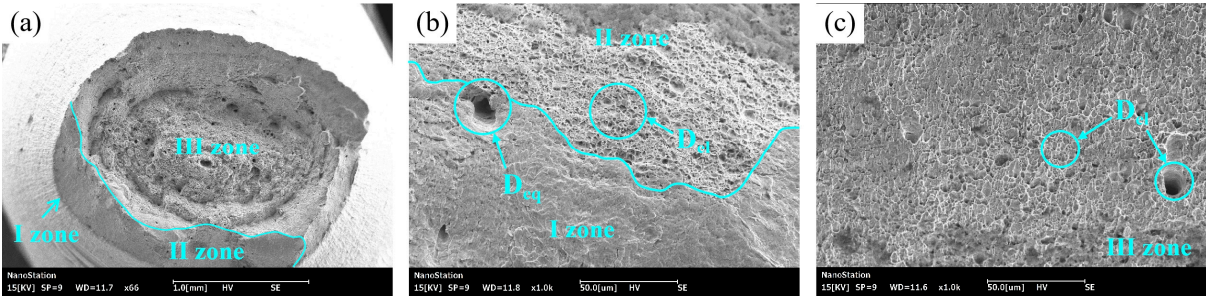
Fatigue fracture morphology of the specimen under 590 MPa maximum stress: (a) Macroscopic morphology; (b) I and II zones; (c) III zone.
